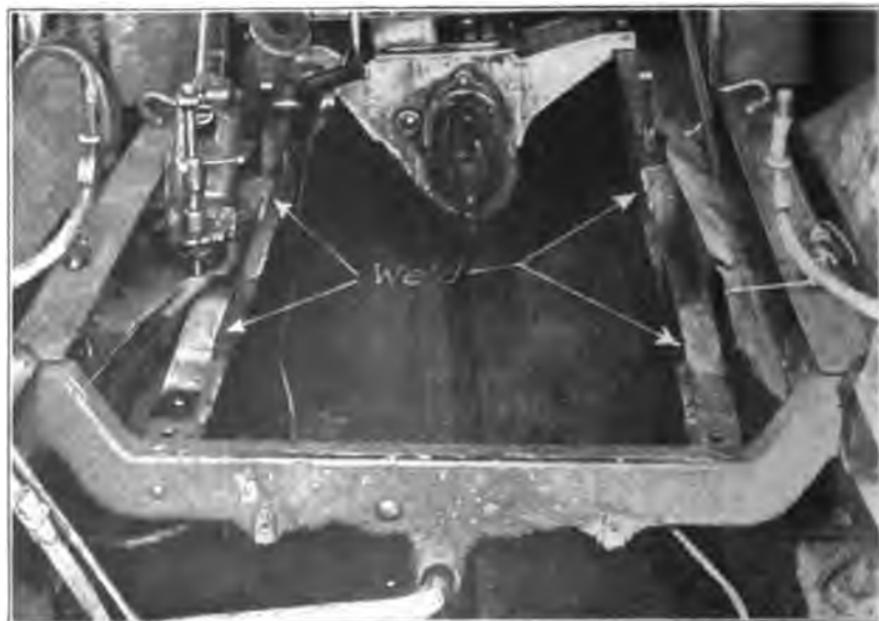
Frame of Fig. 16 Repaired by Electric Welding Outfit
